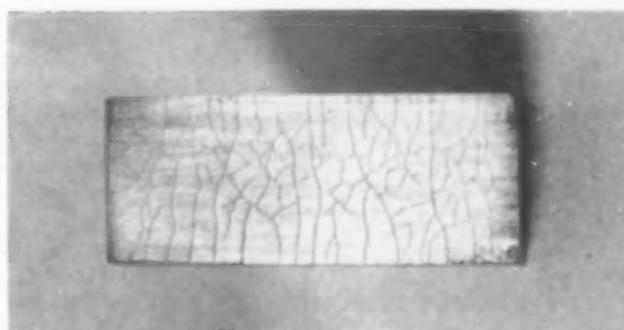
A network of surface cracks is shown on this grinding specimen.
